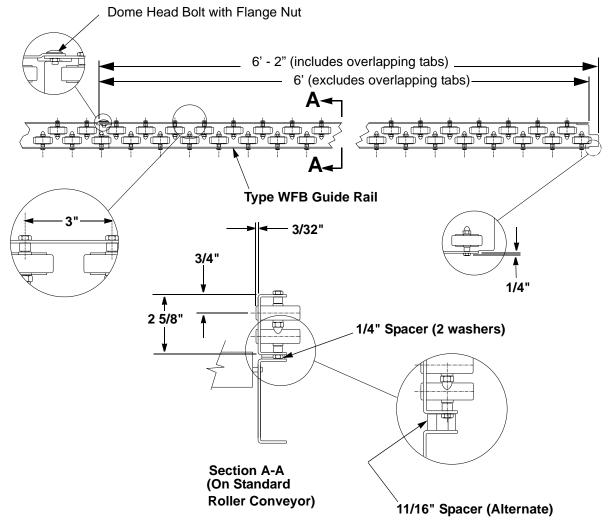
2 5/8" Wheel-Faced Side Guide
